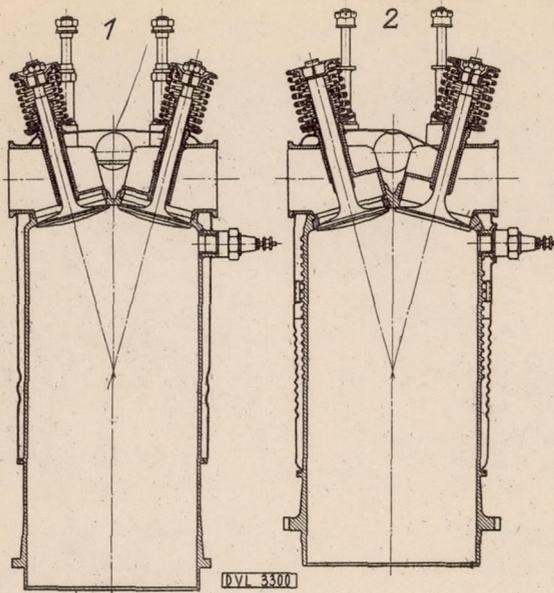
Old and new cylinder types for water-cooled aircraft engines with open valve gear.
